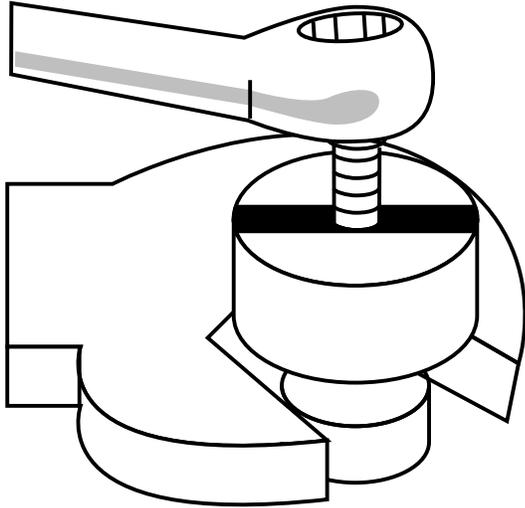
Holding Tool and Turning Center Screw (Clockwise) to Remove Retaining Ring.
